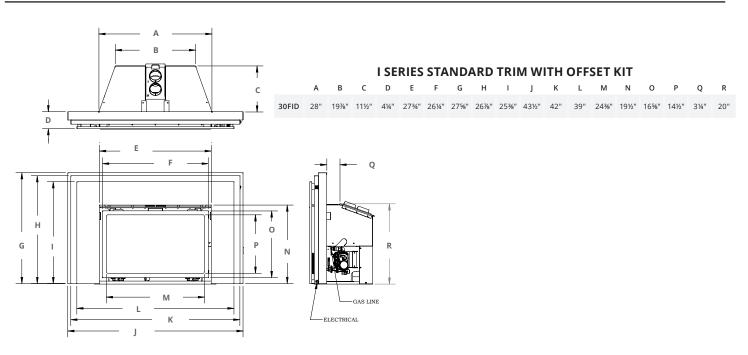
Unit dimensions (Tolerance ± 1/8") [1.25 mm]
